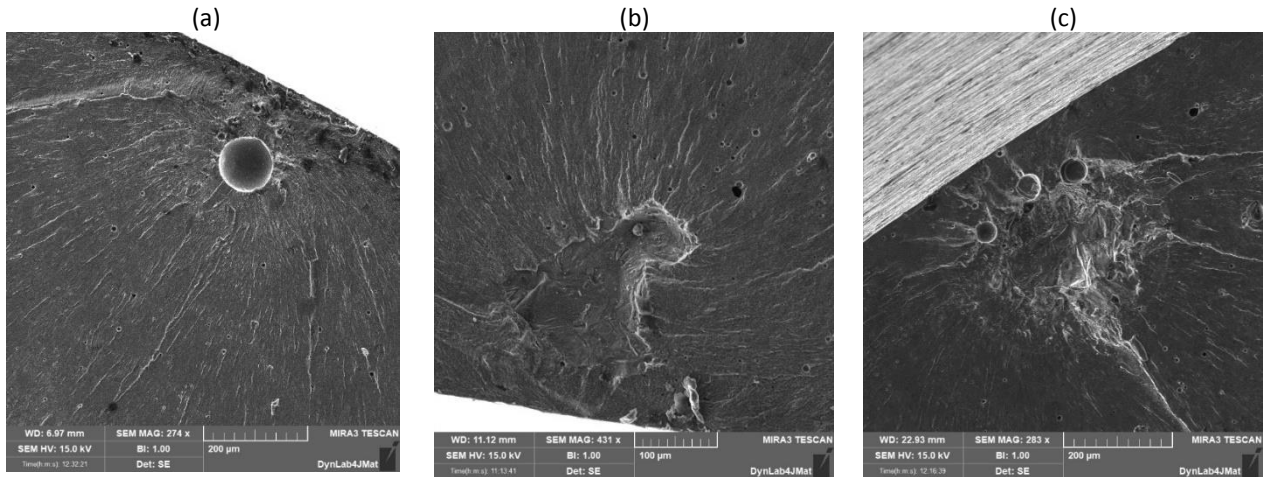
Representative defects found at the origin of the fatigue failures: a) large pore close to the surface (HT-320-5); b) incomplete fusion defect (HT-320-8); c) cluster of pores and incomplete fusion defect (HT-244-4).
